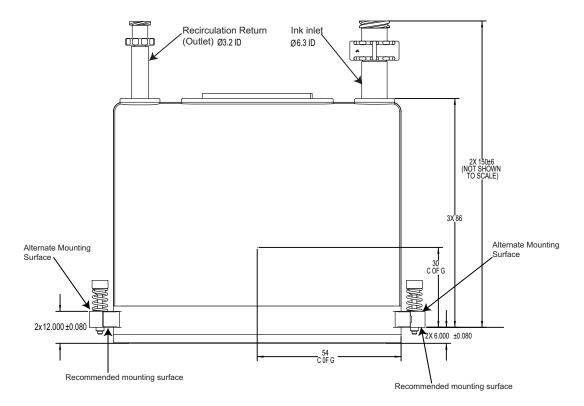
SG1024/A Side view with two sets of mounting surfaces
